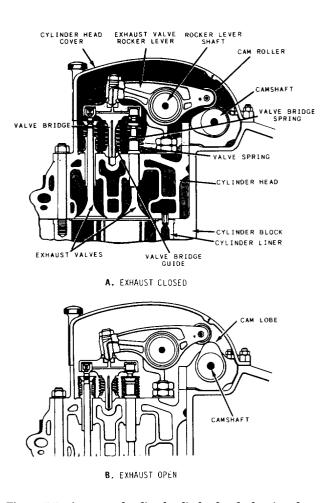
A two-stroke diesel cylinder head, showing the valve-operating mechanism.
